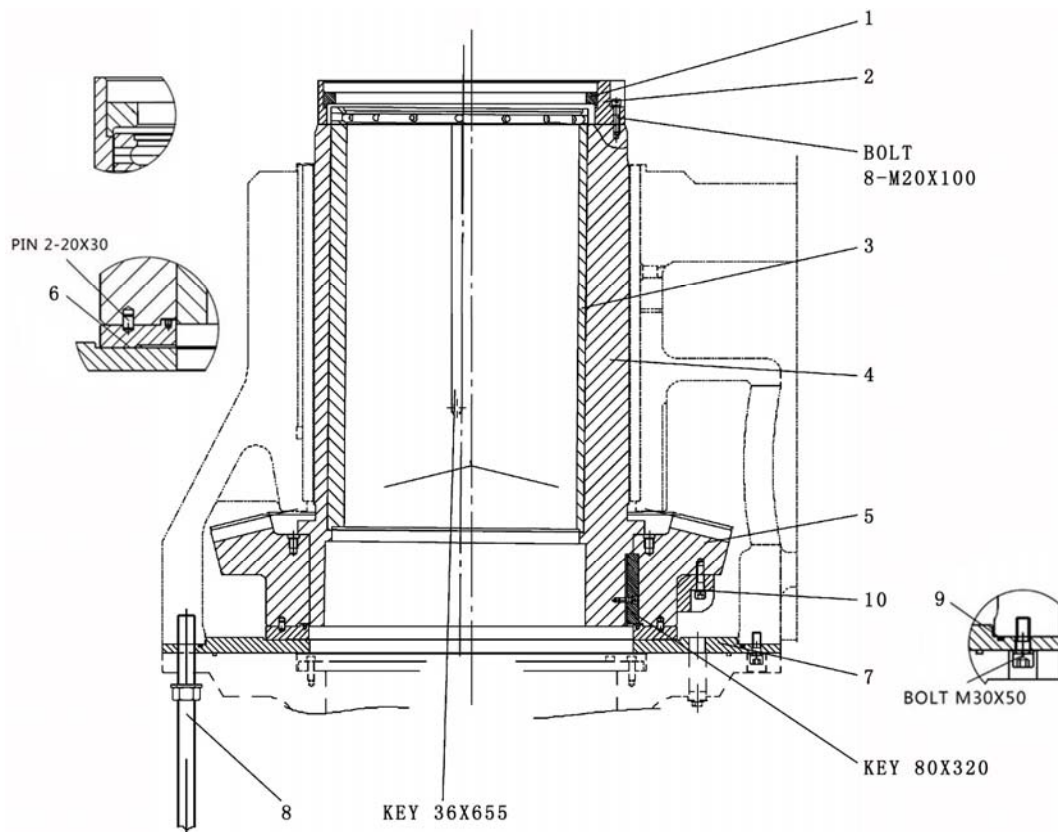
Structure diagram of eccentric bushing of PXZ-1500II gyratory crusher
